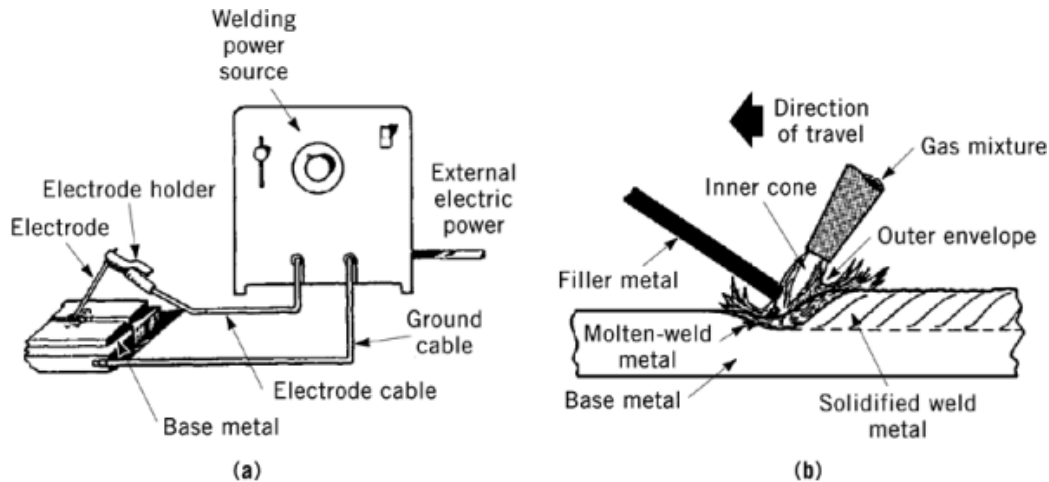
(a) The shielded-metal arc-welding system. (b) The oxyacetylene welding process.
